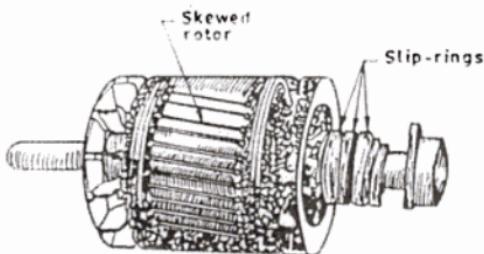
Induction motor with phase-wound rotor, showing the three slip rings on the rotor shaft.
